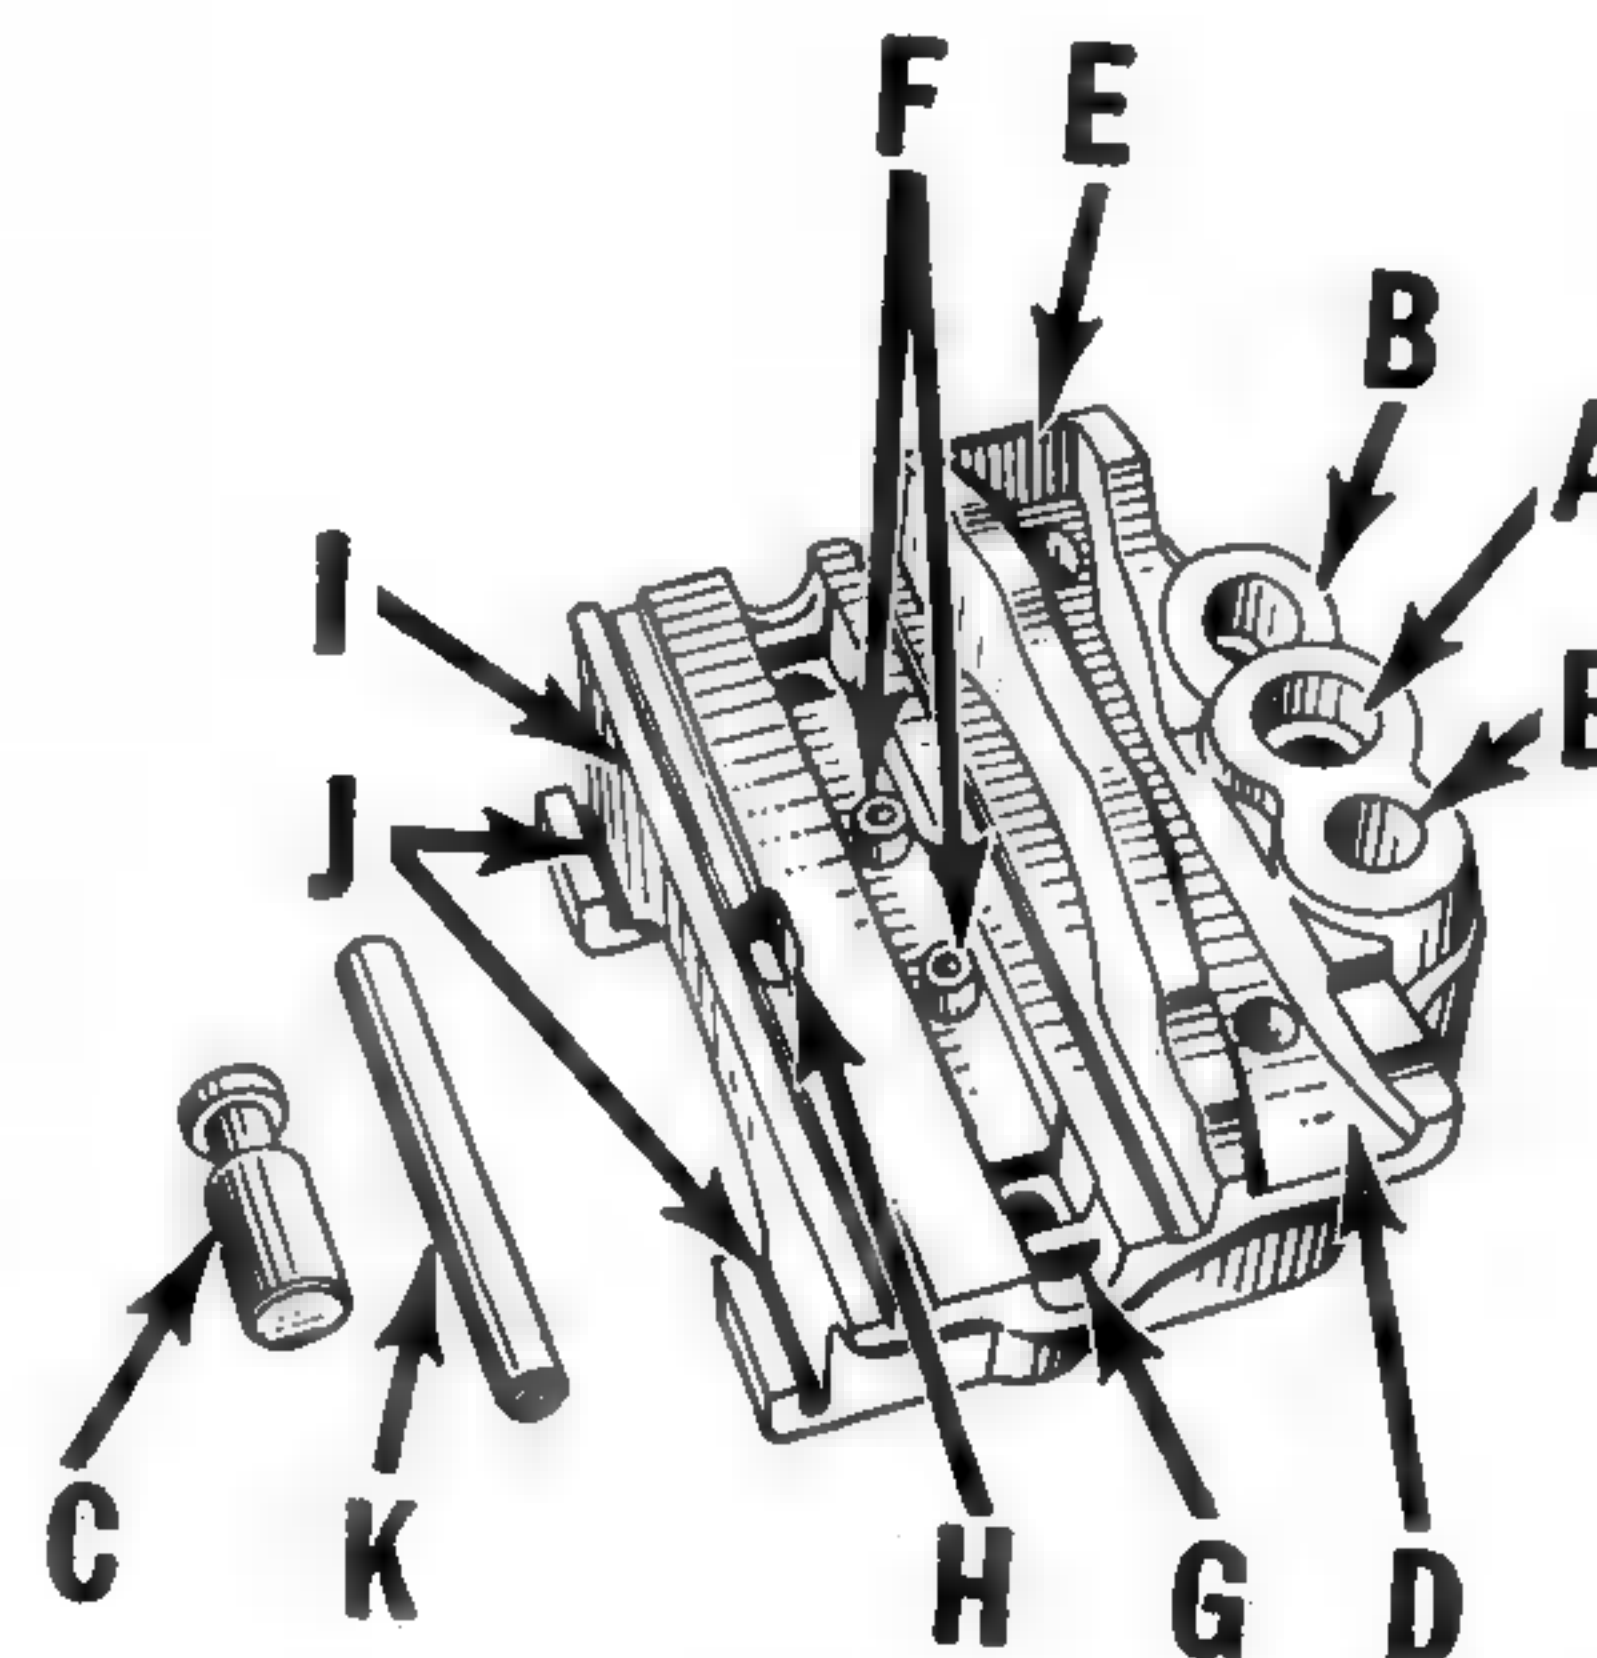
A convenient block for removing and replacing guard plates, knife sections, flywheel wrist pins, and for straightening knives.
